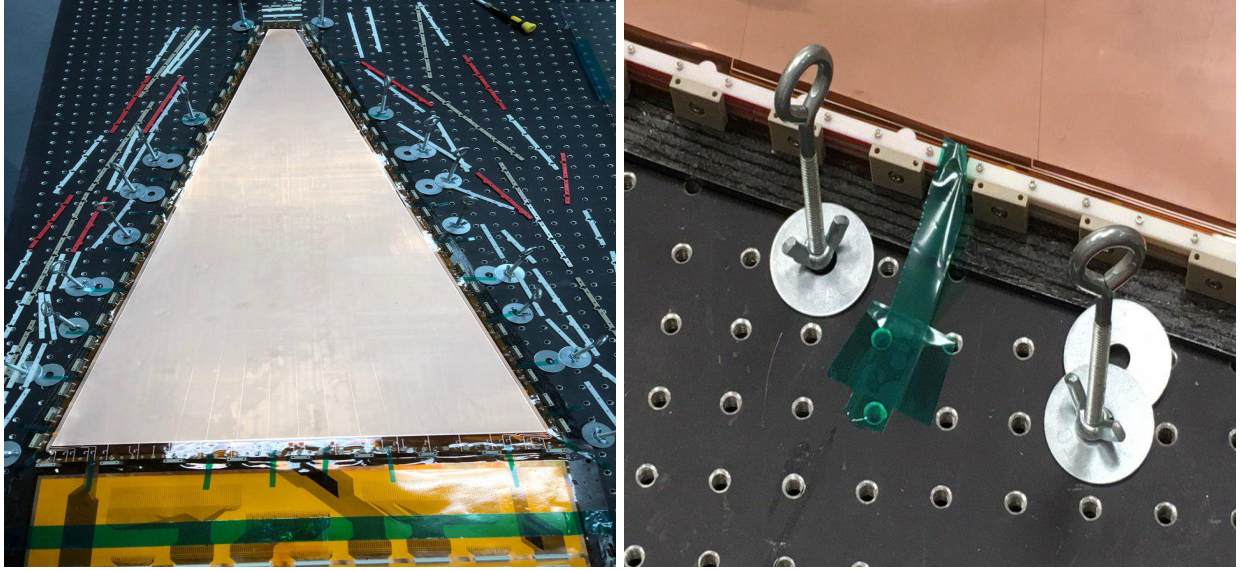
Left: Re-assembly from scratch of large low-mass EIC Forward Tracker GEM detector prototype with carbon fiber frames. Here the GEM3 is being pre-stretched with thin strips of green tapes. Right: Close-up view of GEM foil pre-stretching on the long foil side where a portion of green tape is attached to the small margins of a GEM foil between pull-outs and pulled taut by hand.
